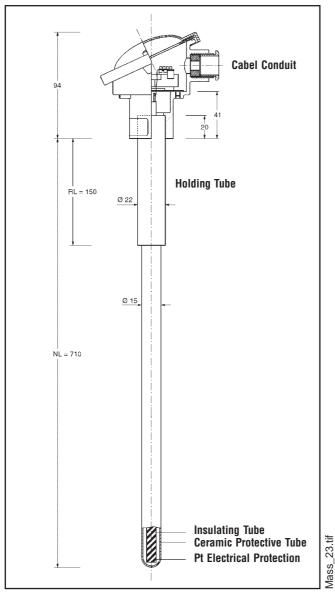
Dimensional drawing – thermocouples with electrical shielding.
